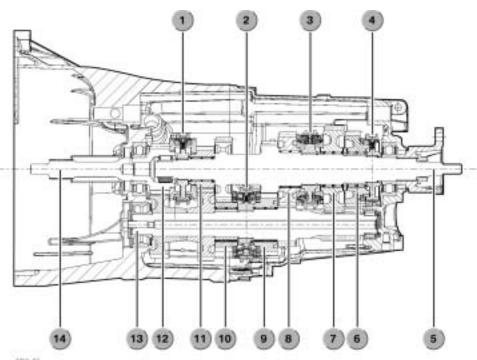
Cutaway view of GS6-37BZ manual gearbox
